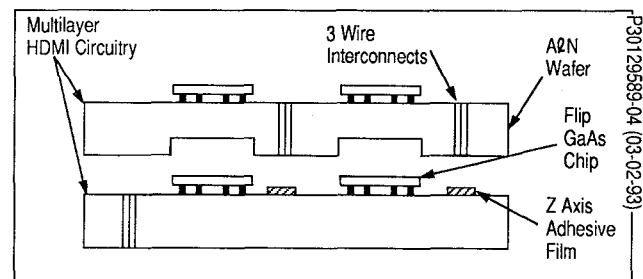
Molded Three Wire Interconnects Will Provide RF Feedthroughs for 3-D Conformal Packaging
